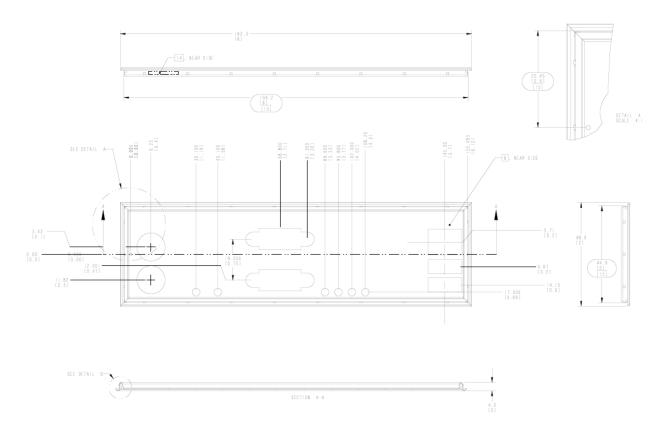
Pedestal Mount I/O Shield Mechanical Drawing for the Intel® Server Board S3200SH-V
